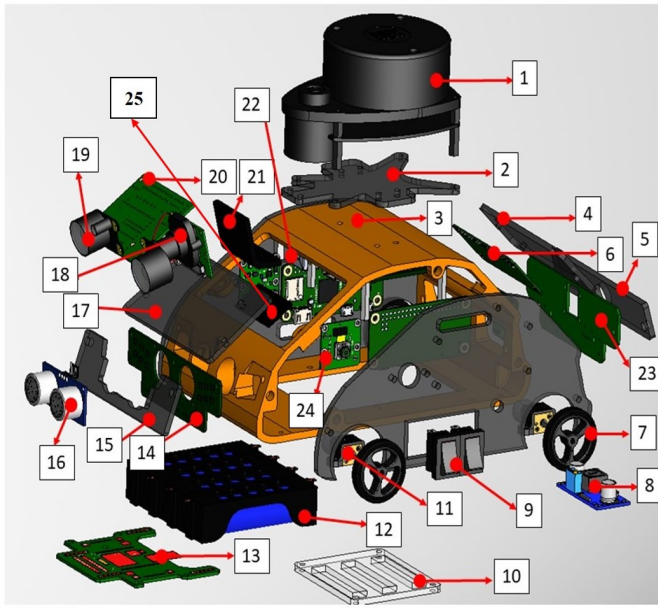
Exploded SolidWorks rendering of Go-CHART, with components labeled.
